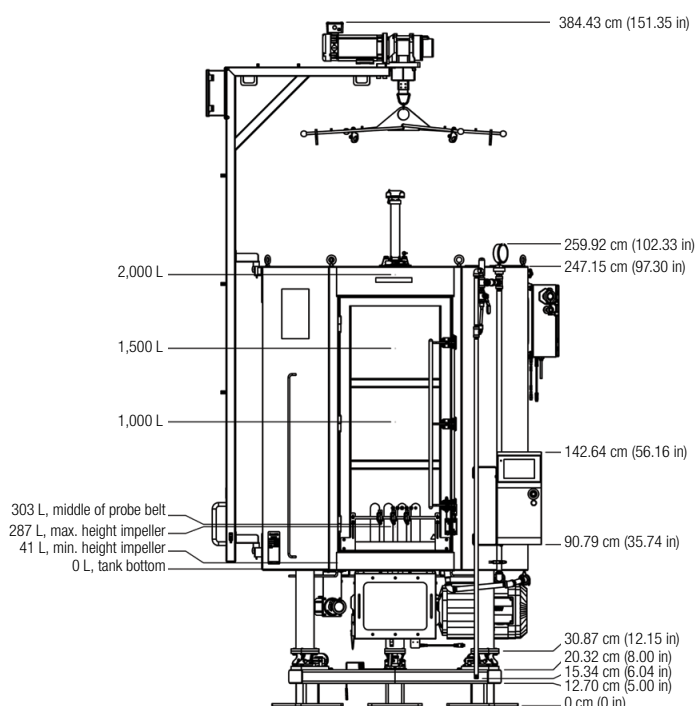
Drawing of the 2,000 L imPULSE S.U.M.
